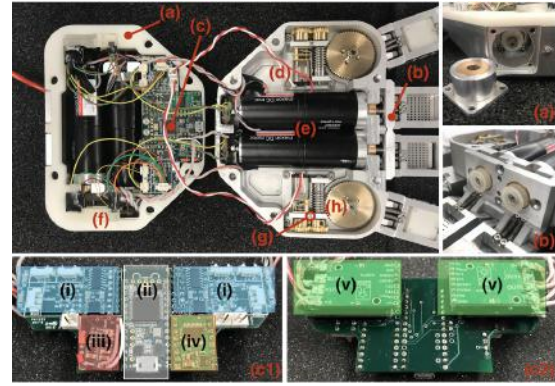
Actuation and electronics design in the palm chamber: (a) double bushings shaft support for bottom chamber motors; (b) double bushing shaft support for top chamber motors; (c) 4-layer PCB board; (d) small motor and worm drive assembly; (e) big motors; (f) mounting plates for hall effect transducers to measure rotary finger position and torque; (g) cubic magnet for torque sensing and (h) worm gear mounted to the finger base and magnet for its position sensing. More details about the 4-layer PCB board are in front view (c1): (i) sensor signal conditioning circuits, (ii) Teensy 3.2 micro-controller, (iii) power regulator, (iv) dual channel small motor driver and in rear view (c2) where (v) are four stacked big motor drivers.
